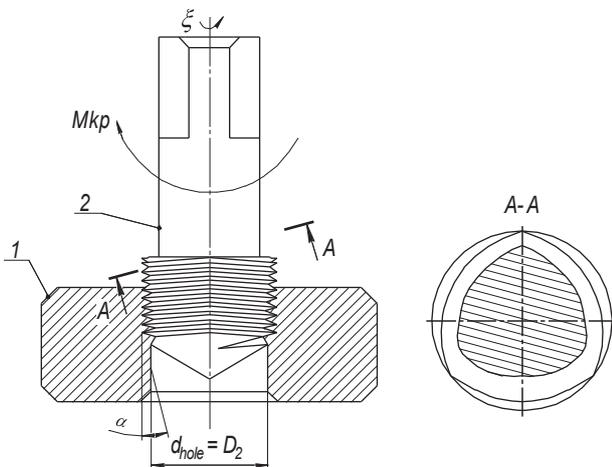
Schematic of extruding a thread at torsional oscillations: 1 – a part; 2 – a tap
